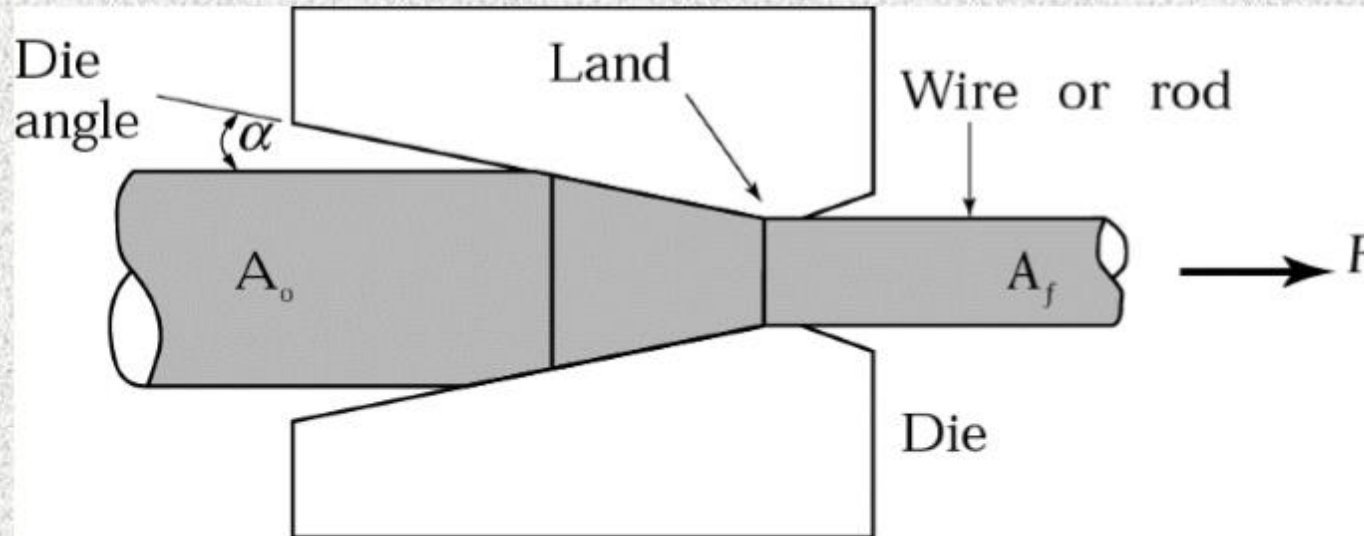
Process variables in wire drawing. The die angle, the reduction in cross-sectional area per pass, the speed of drawing, the temperature, and the lubrication all affect the drawing force, F .
